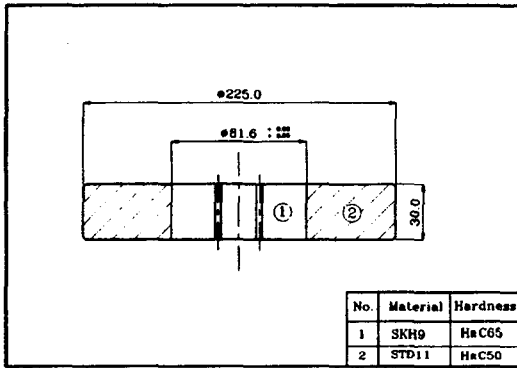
Schematic drawing of designed die with modified die materials (insert : SKH9, stress ring : STD11)
